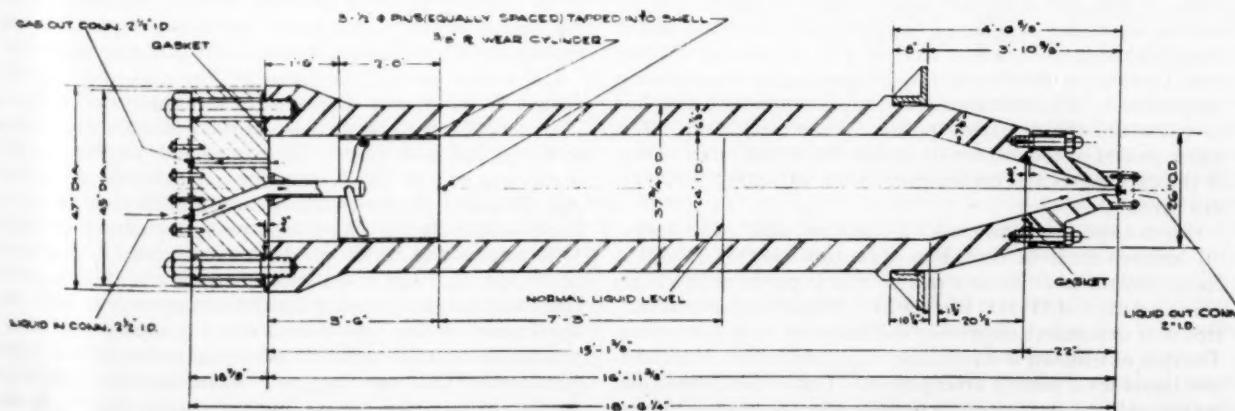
COLD CATCHPOT AND COMPRESSOR SUCTION TRAP ASSEMBLY
